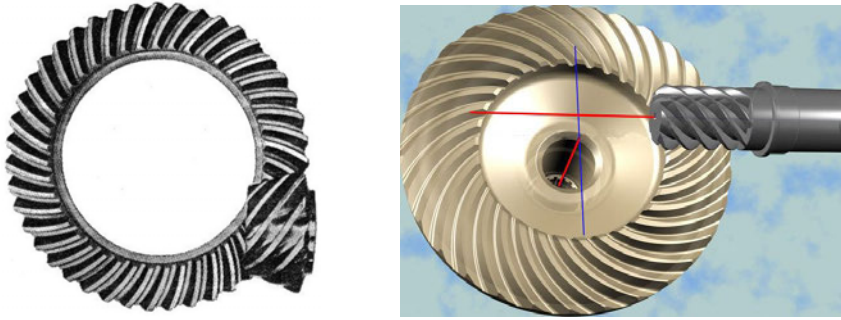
Bottom and top pinion layouts for a final drive [Zakgear technology]
